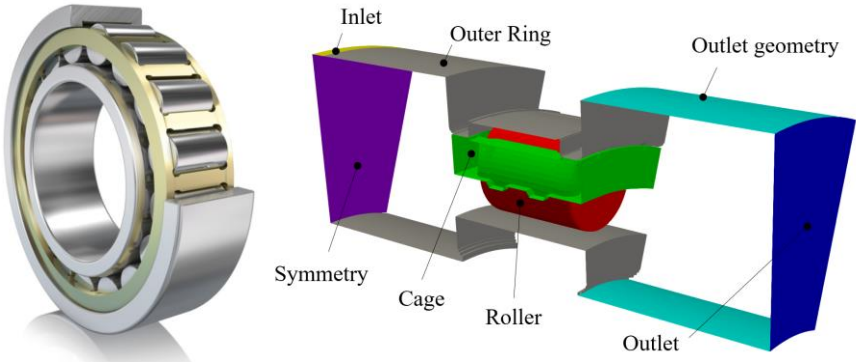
Schaeffler NU222-E-XL-M1A bearing.
